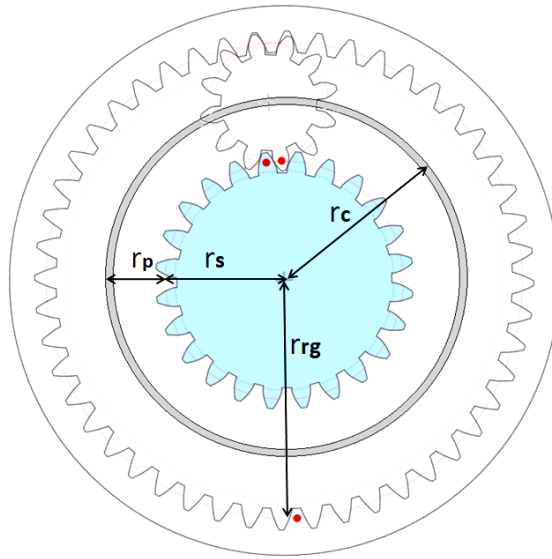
Illustration of a planetary gearbox with 1 planet gear.  $r_s$  is the sun gear radius,  $r_p$  is the planet gear radius,  $r_{rg}$  is the ring gear radius, and  $r_c$  is the carrier radius
